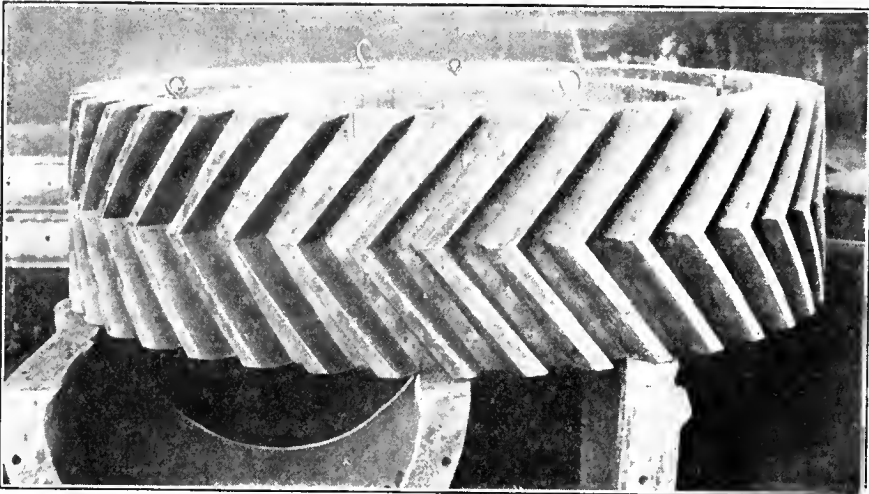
PATTERN OF LARGE HERRING-BONE GEAR.
